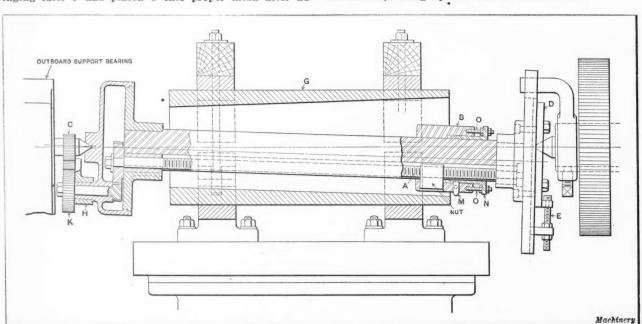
Taper Boring Device mounted on Horizontal Boring Machine in Position for boring Single Taper
